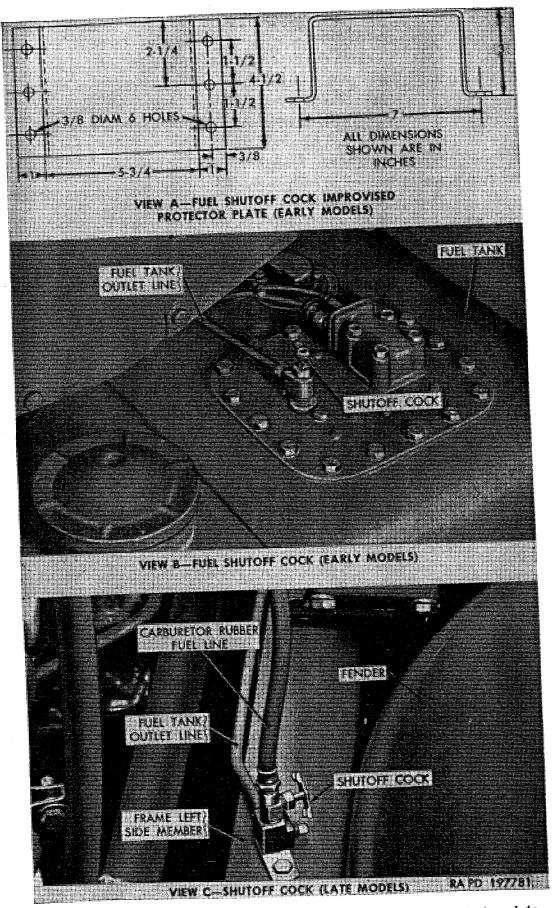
Fuel line shutoff cock locations and improvised protector plate.
